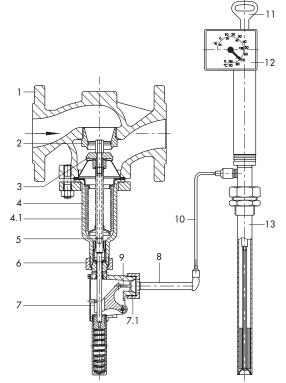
· Type 4u Temperature Regulator with Type 2114 Valve, reversing device and Type 2231 Thermostat
